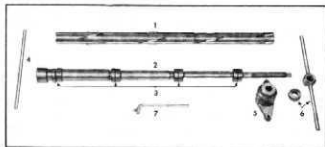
Camshaft Bearing Removing and Replacing Tools
